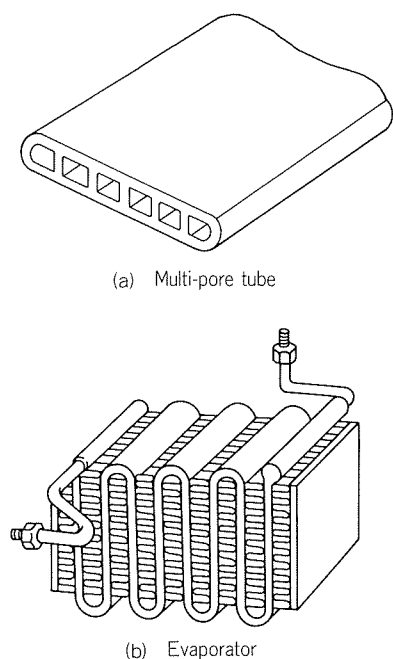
Aluminium evaporator for automobile air conditioning unit made by vacuum brazing.
